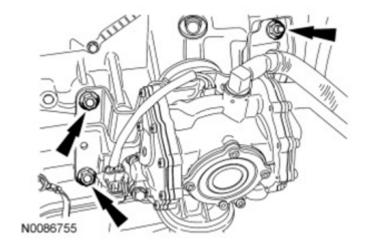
Locating Vacuum Hose From Intake Manifold Courtesy of FORD MOTOR CO.
